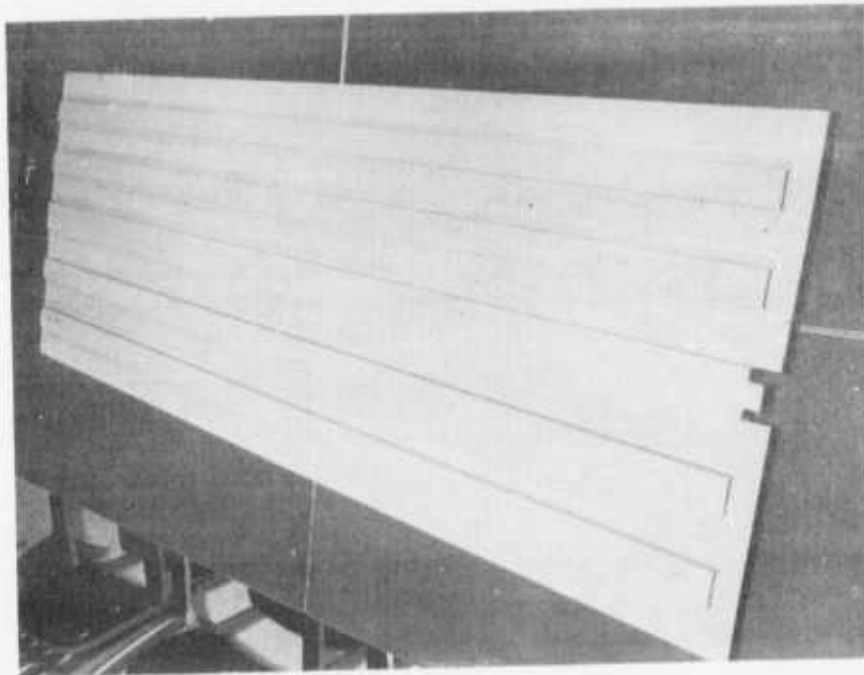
A SECTION OF THE C-130 CARGO FLOOR
